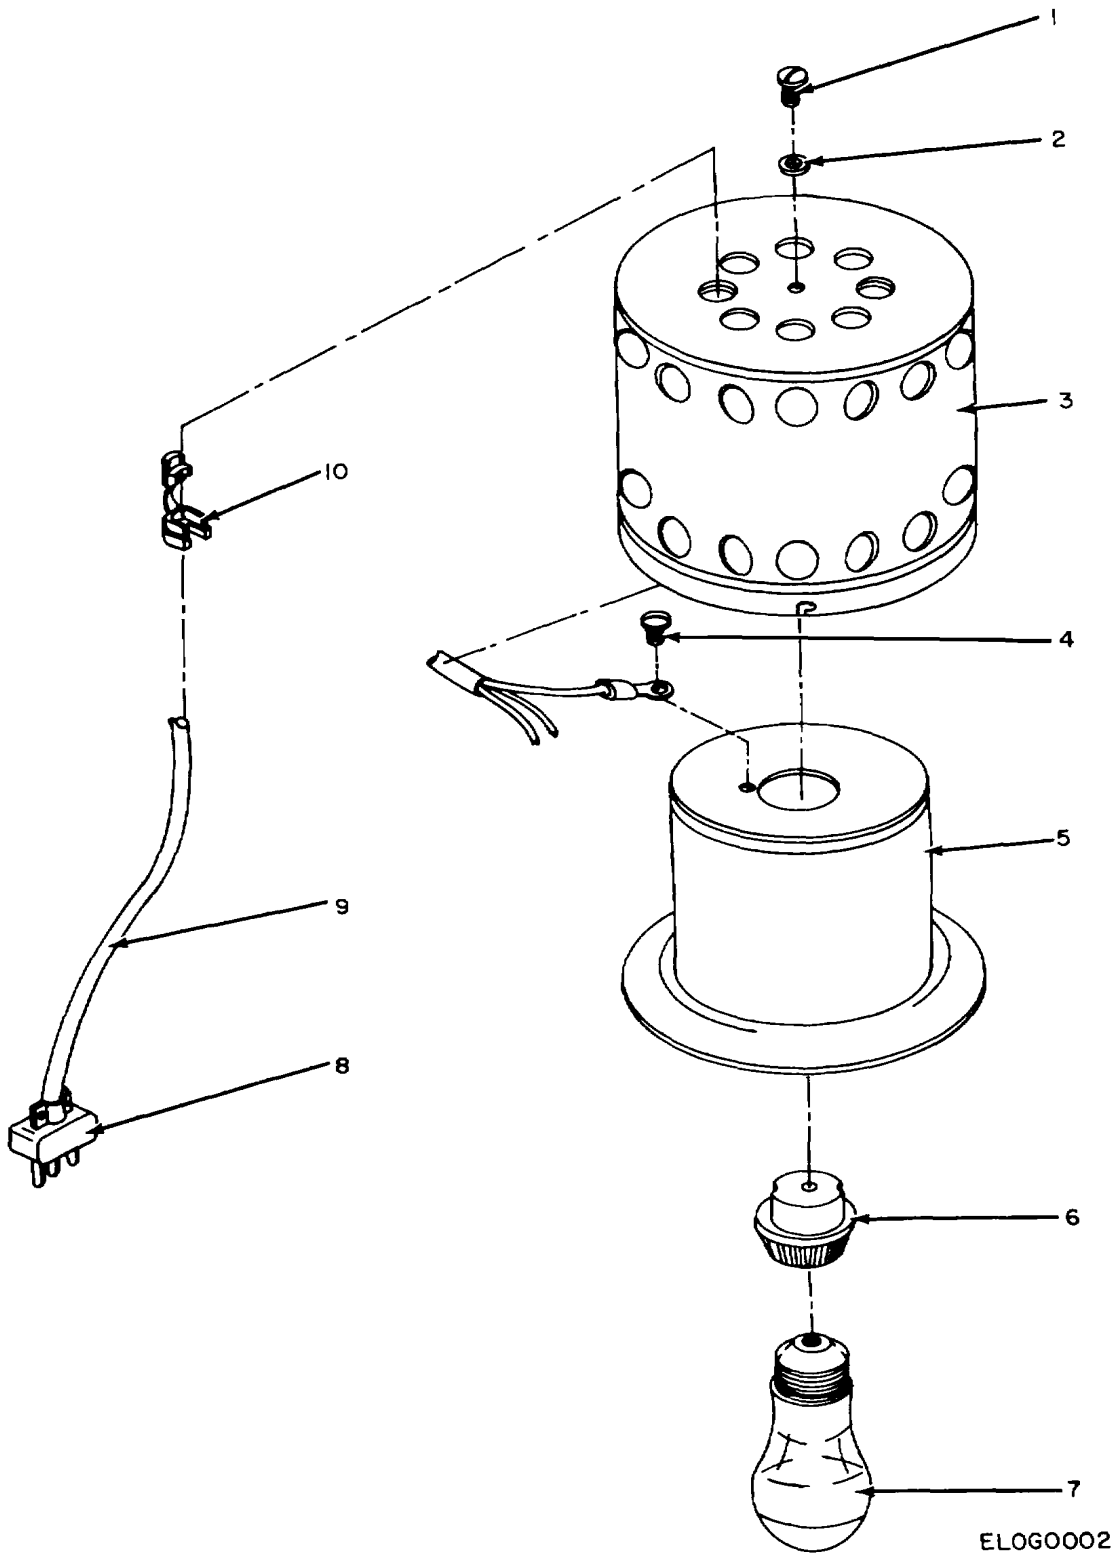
Printer, Projection, Photographic EN-91B, Lamp Housing Assembly.
